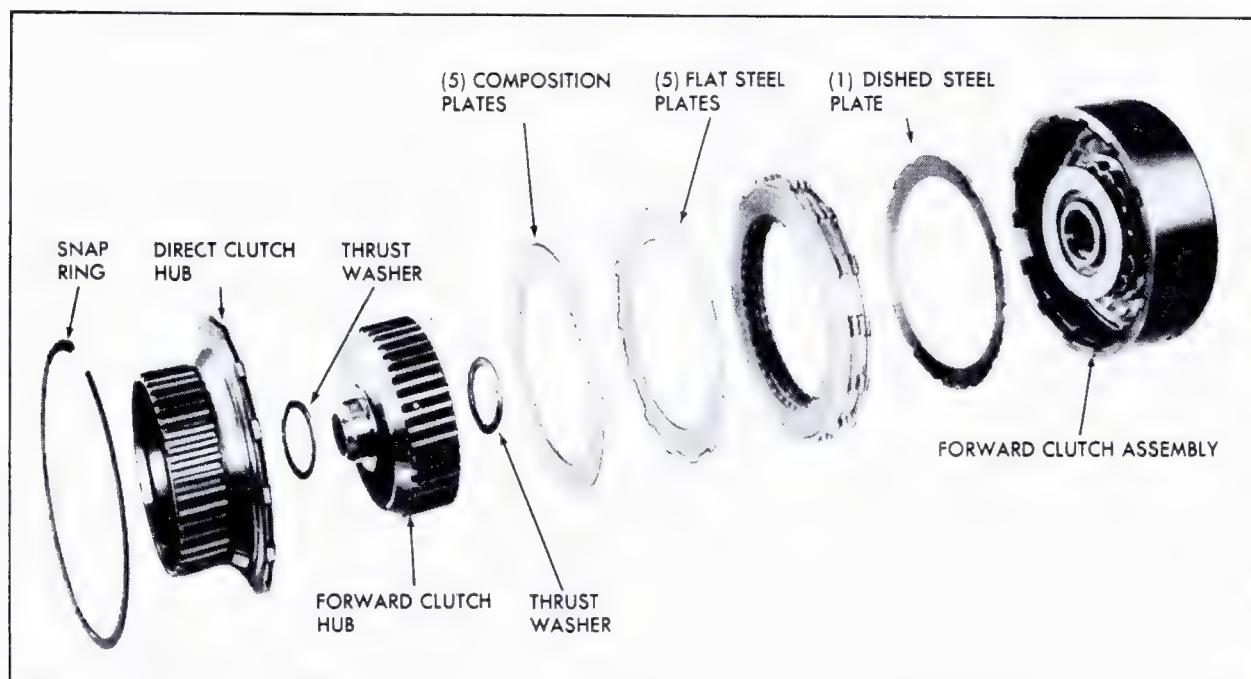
Forward Clutch and Forward and Direct Clutch Hubs Disassembled
